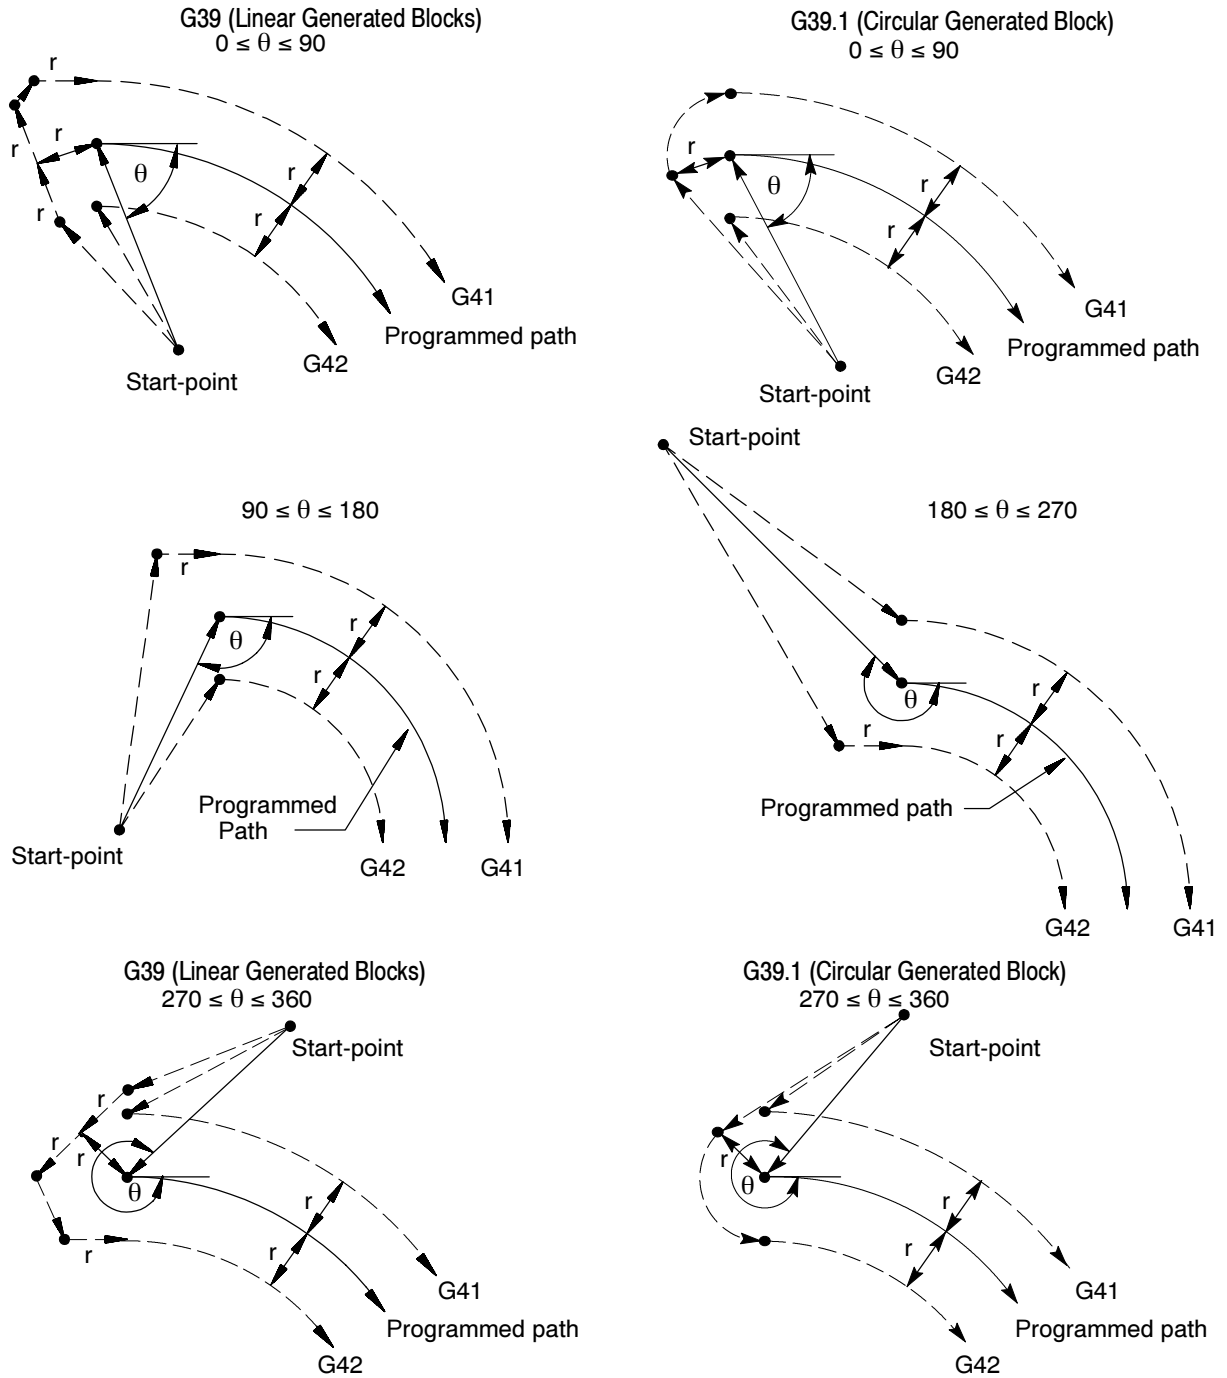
and 20.19 show examples of typical entry moves using type B cutter compensation:
